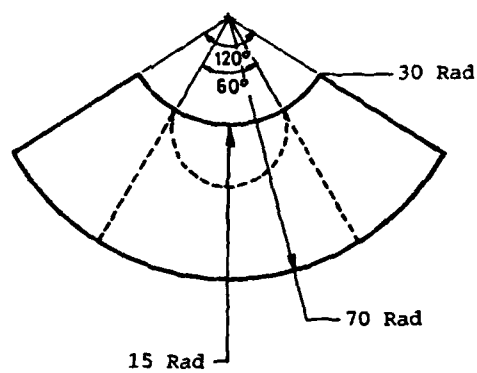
(b) DETAILS OF SPARK MACHINED CRACK AT SECTION A-A.
